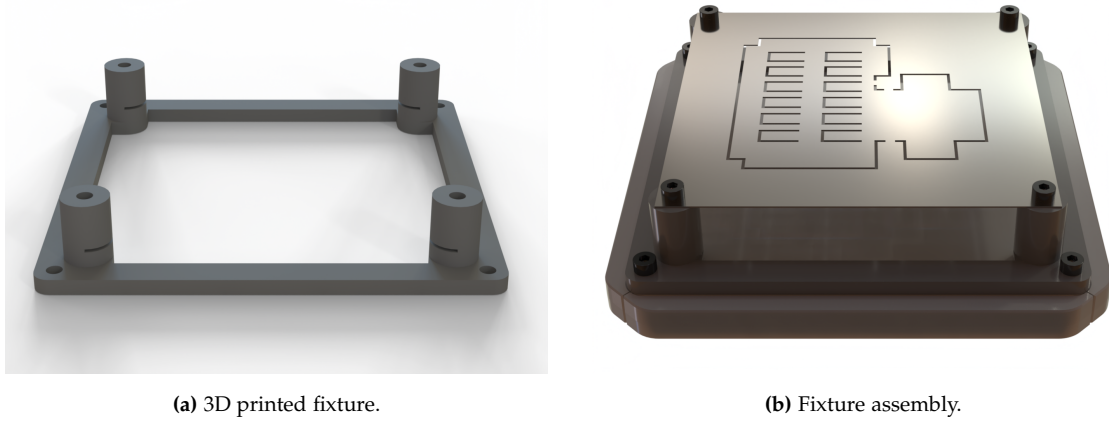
Fixture and complete assembly of Beckhoff mover, fixture and assessment part.
